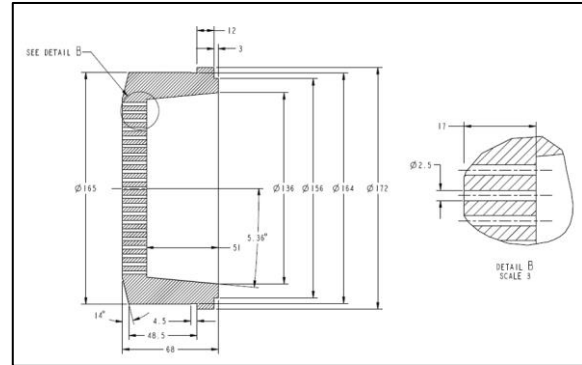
(b): Breaker plate with Straight holes 2D Drawing
